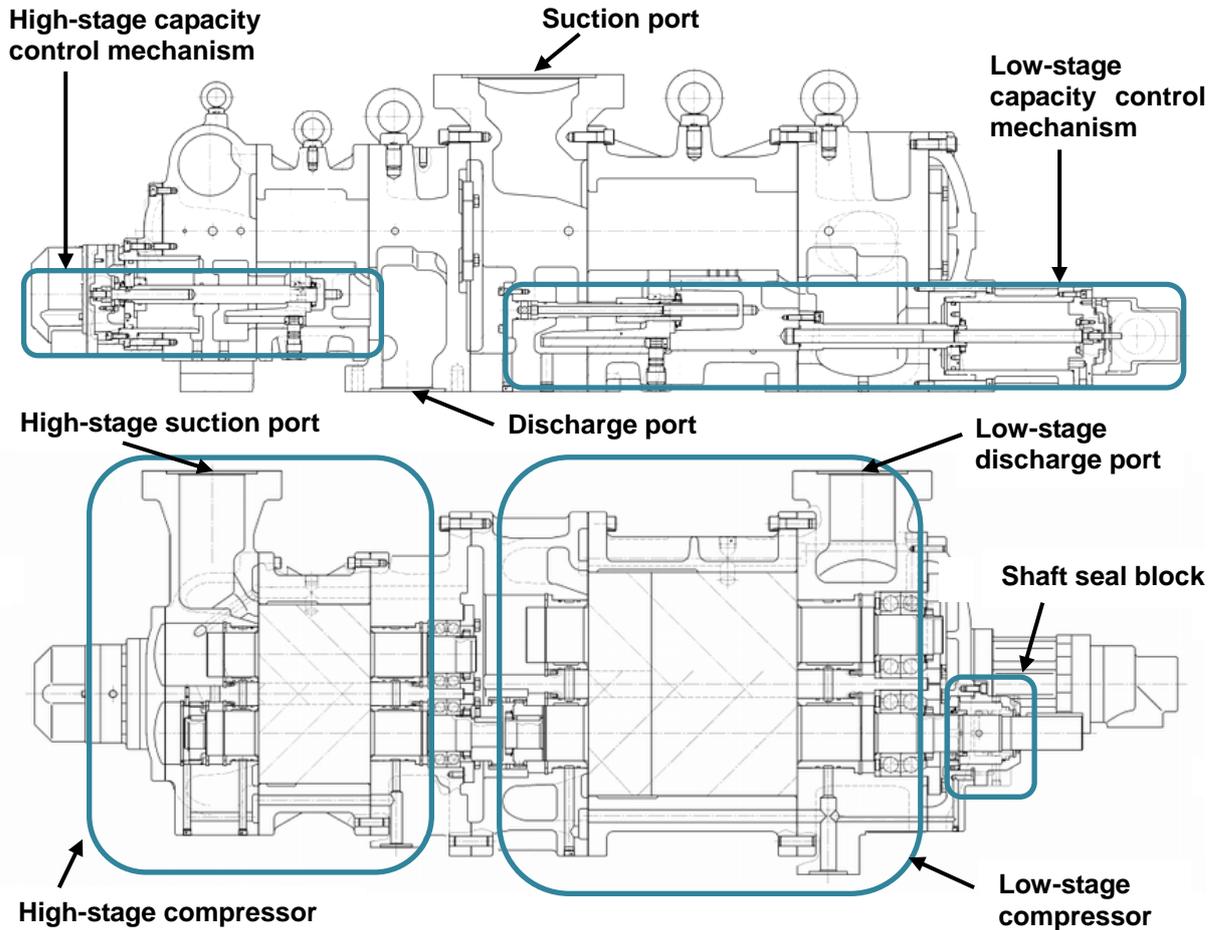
2016\*\*C Screw Compressor Sectional View
